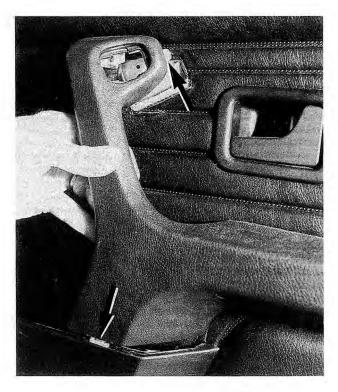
Front armrest being disengaged from door trim panel. Note locking tabs (arrows). Pull armrest forward and out.
